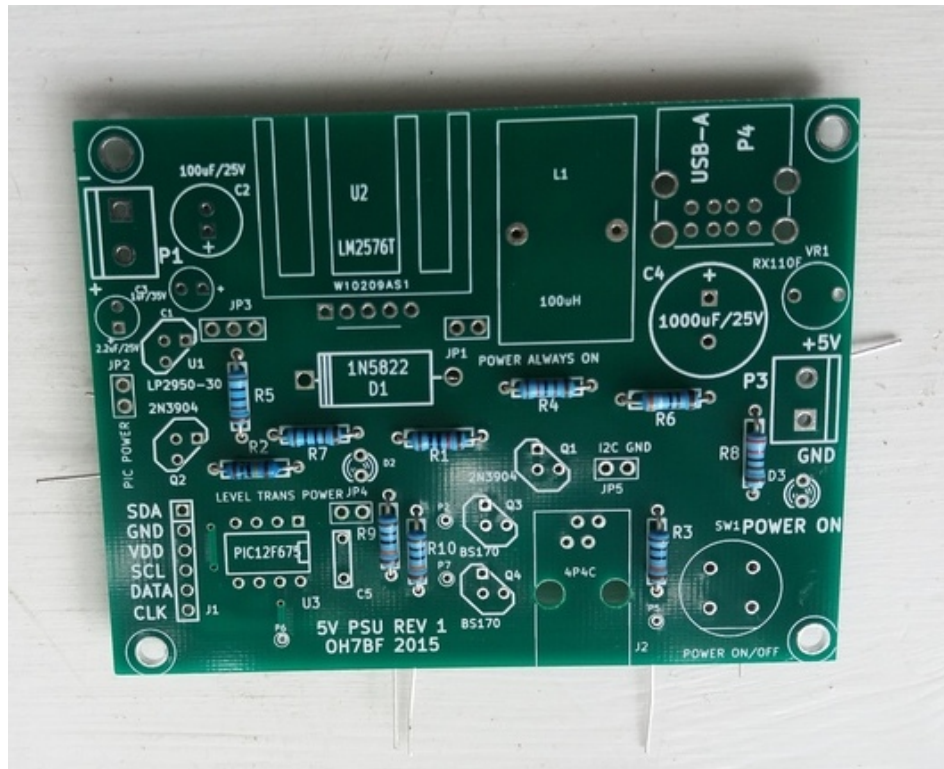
Soldering of resistors R1 - R10 on PCB. Cut and trim the leads on the other side.
